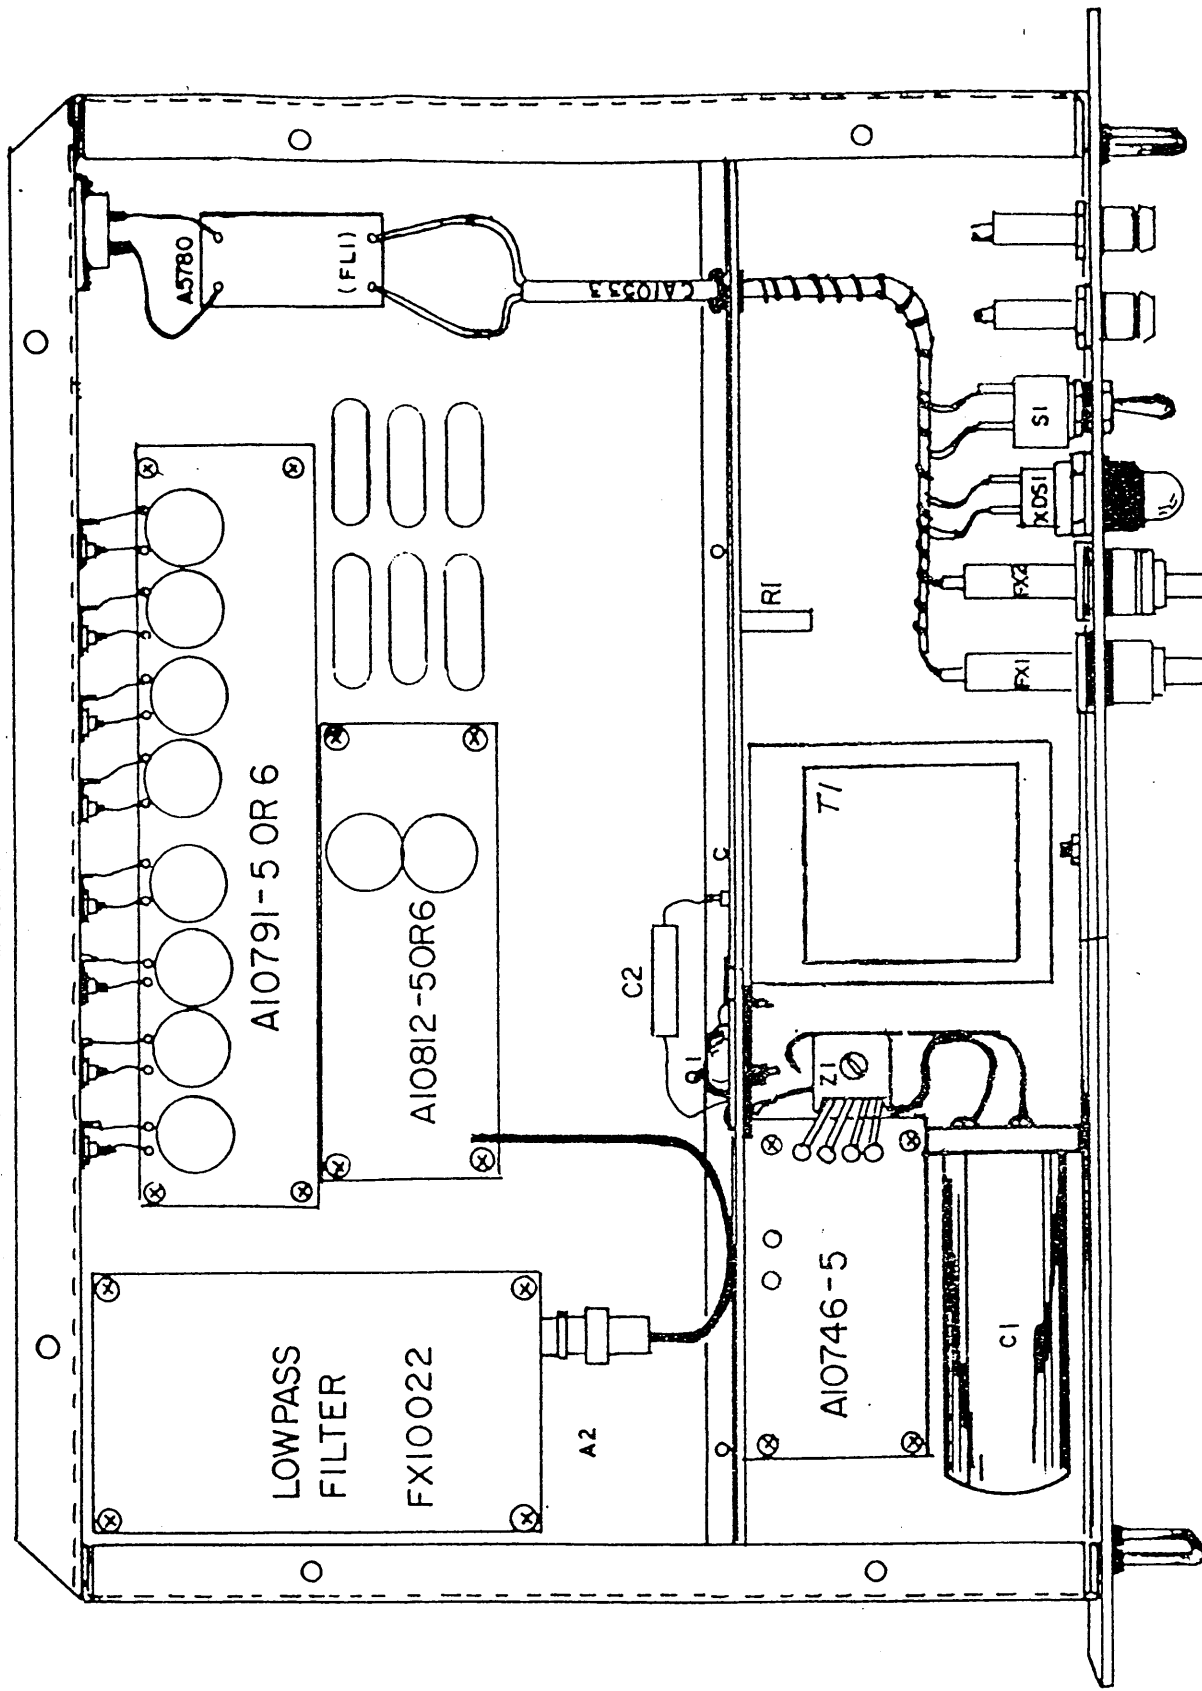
ASSEMBLY LINE DRAWING, TOP VIEW
